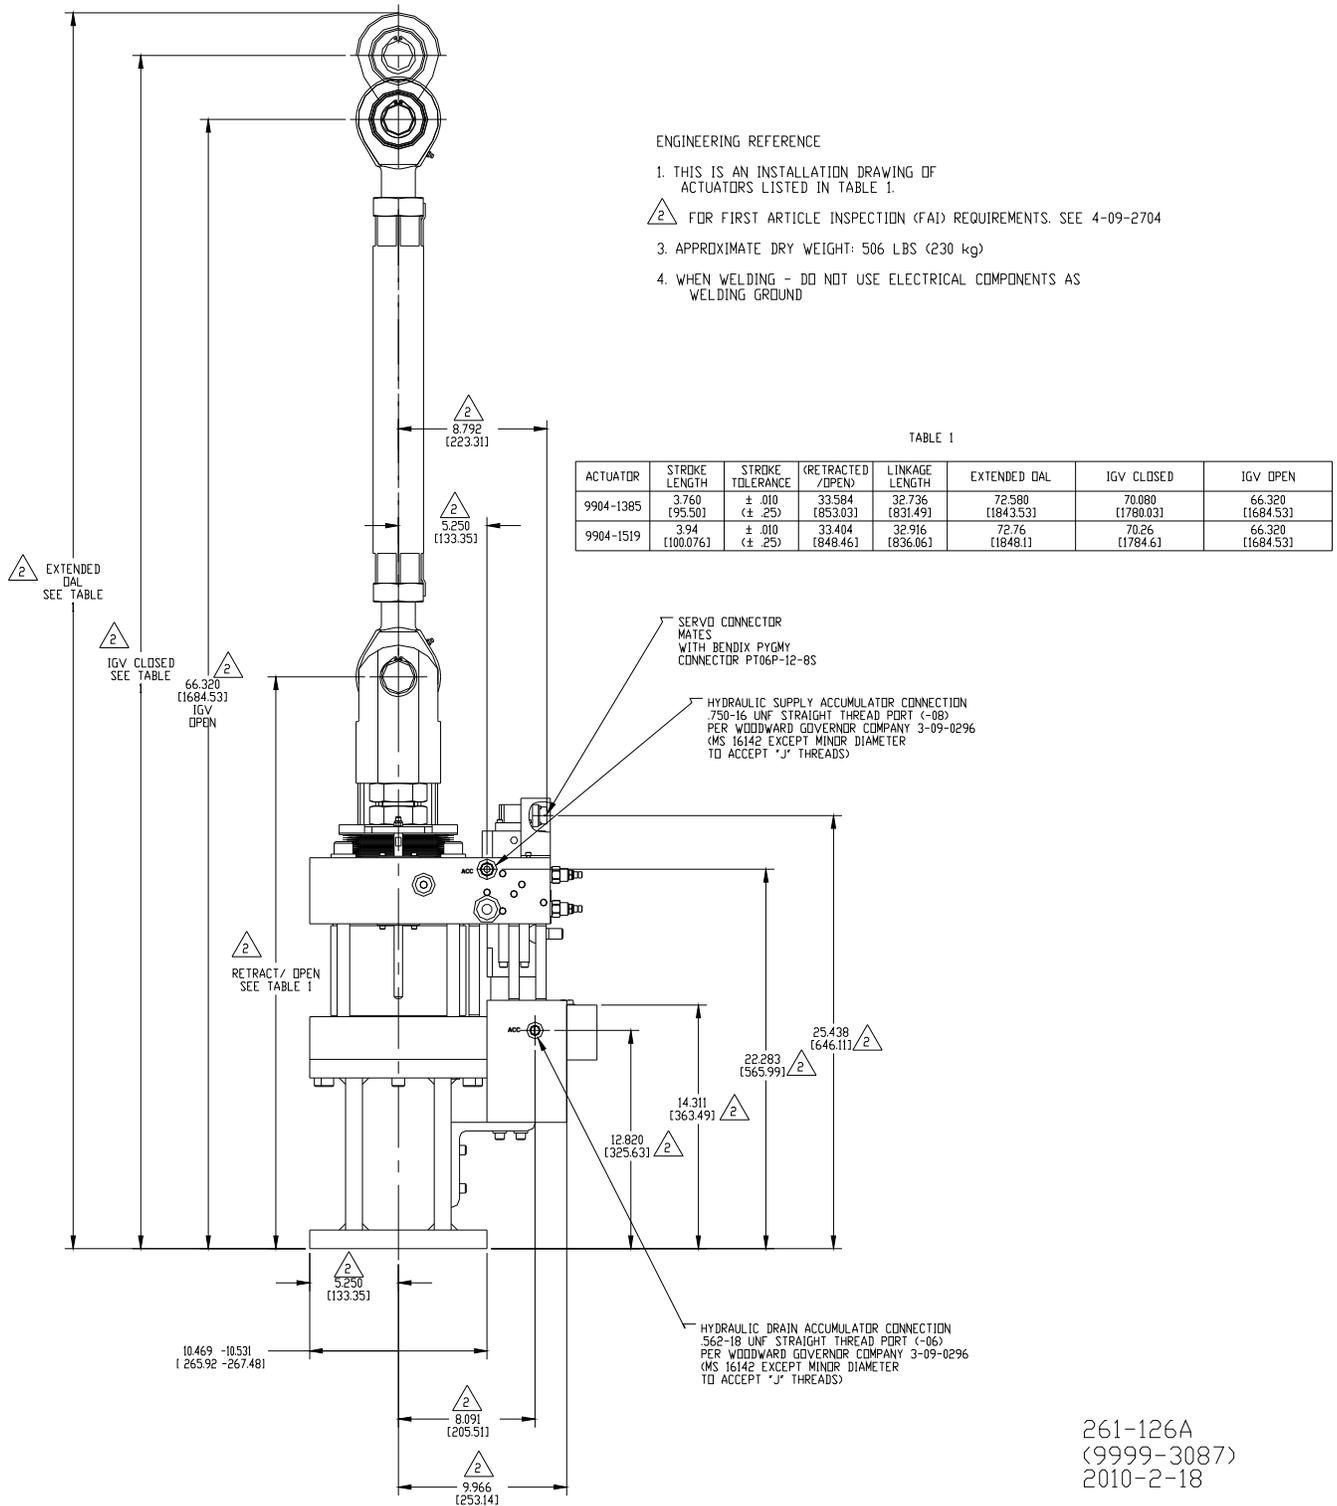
9F IGV Actuator, High Pressure Trip with Internal Check Valve (left side view)
